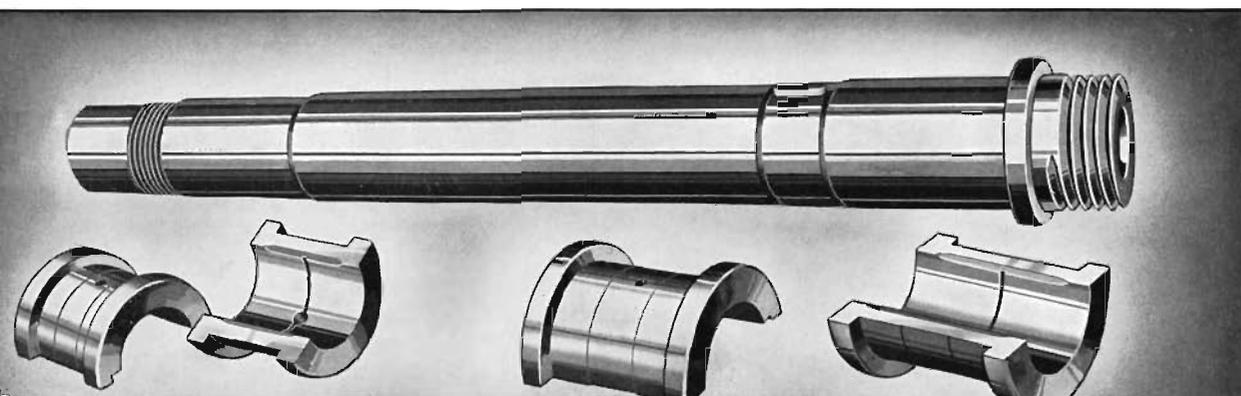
Hardened and Ground Headstock Spindle and Phosphor Bronze Spindle Bearings.
